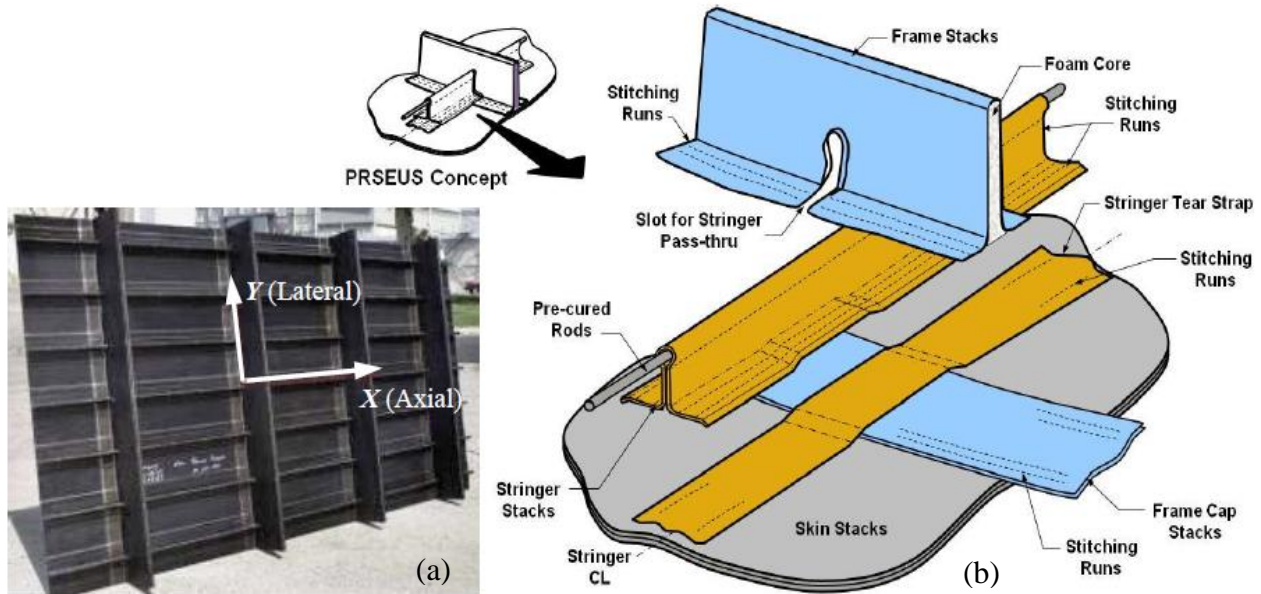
PRSEUS: (a) sample panel and (b) exploded view of the assembly.
